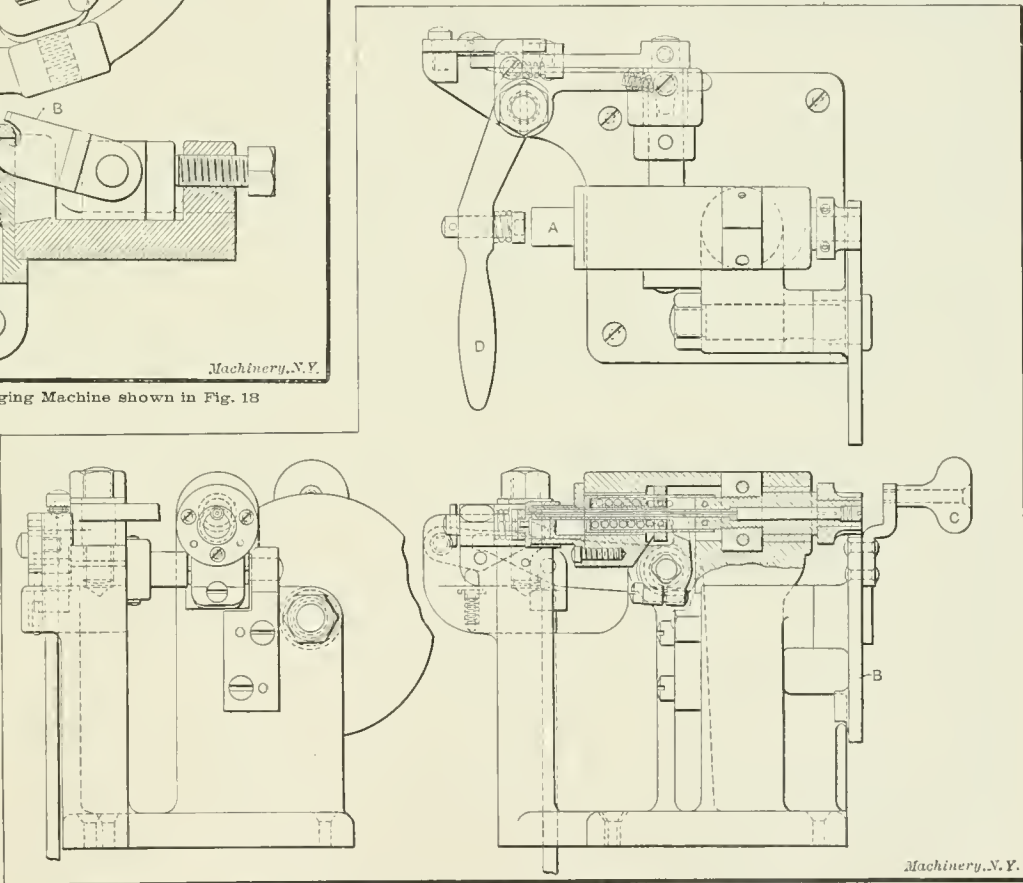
Construction of Assembling Machine shown in Fig. 19
